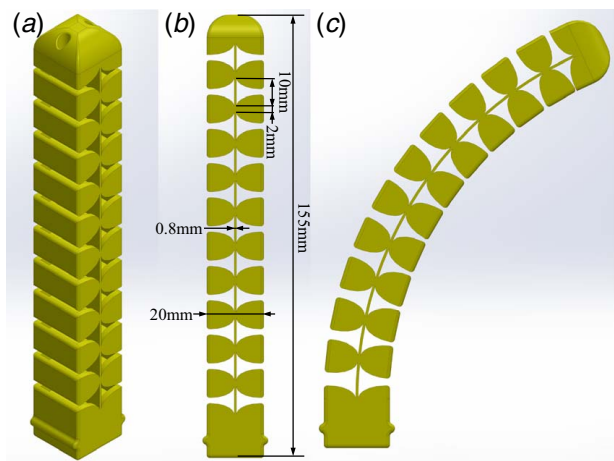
Views of the backbone: (a) isometric, (b) front, and (c) morphed shape
